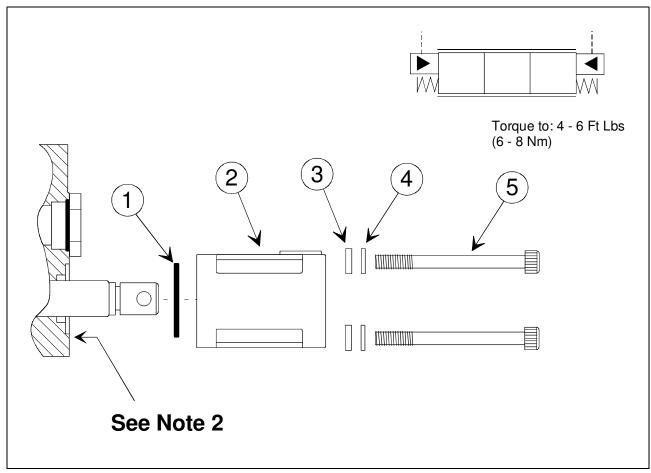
'HR' Hydraulic Remote Spool Actuator (Spool Clevis End)
